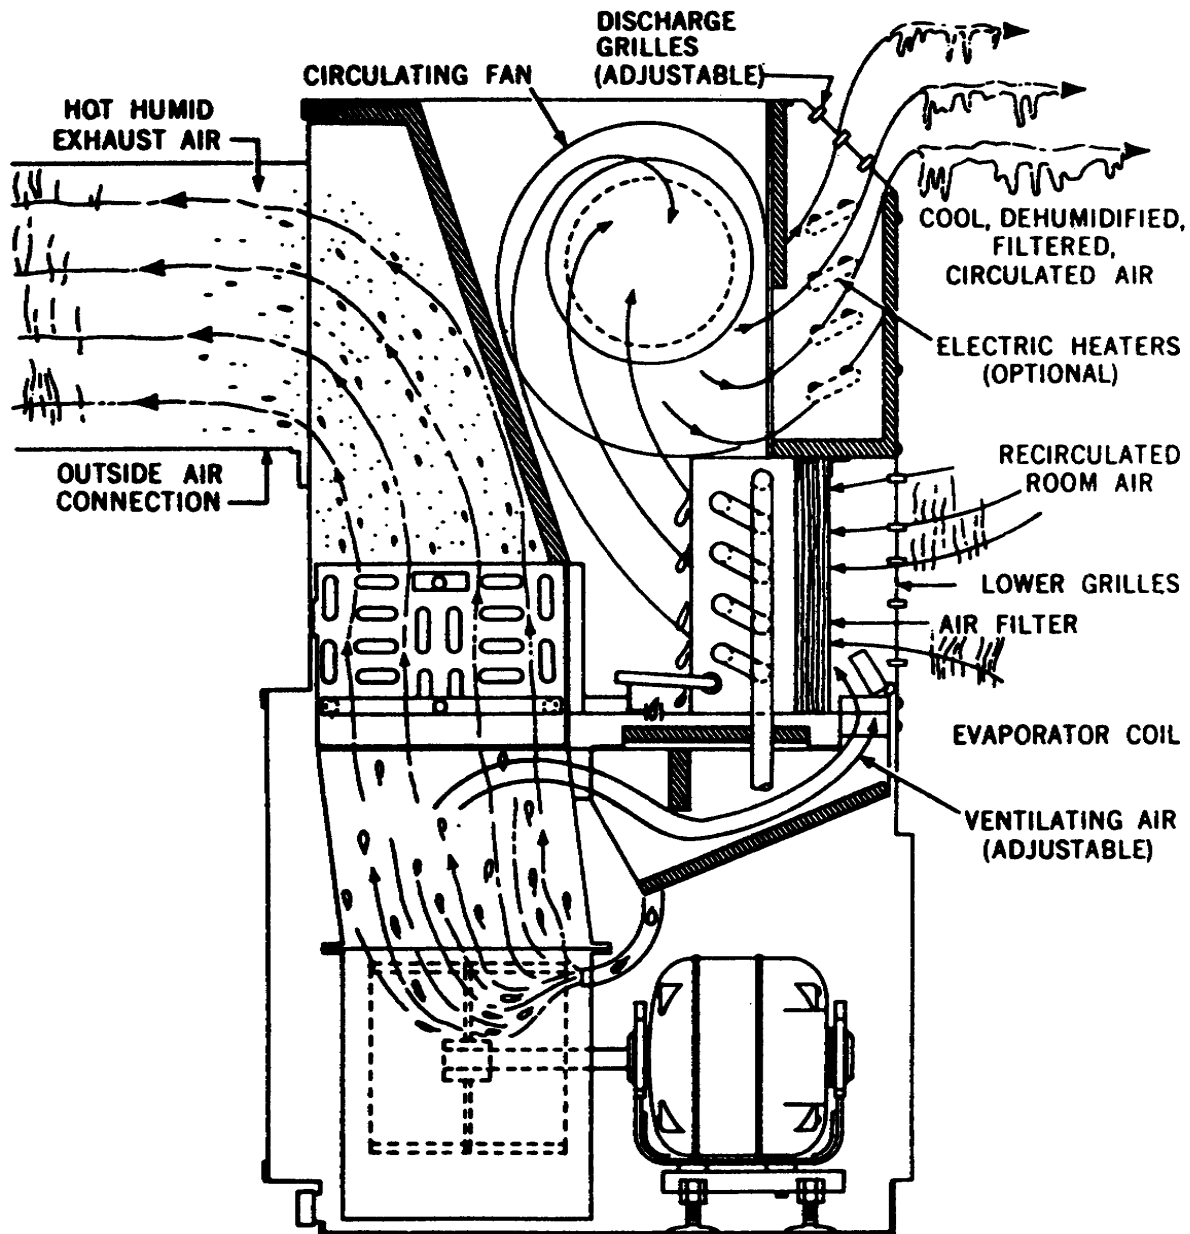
Sectional view of an air-cooled floor-mounted air conditioner.
